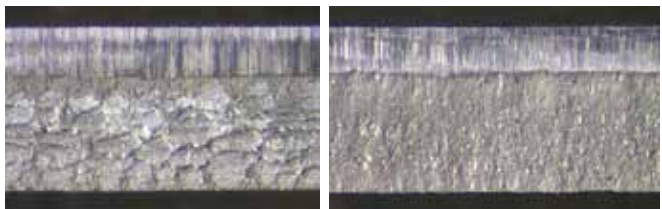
Sheet edge appearance for Domex 700 MC, t=2 mm with different cutting conditions. The left image indicate that cutting clearance and/or shearing angle is too large. The right image indicate that the cutting conditions are OK.
